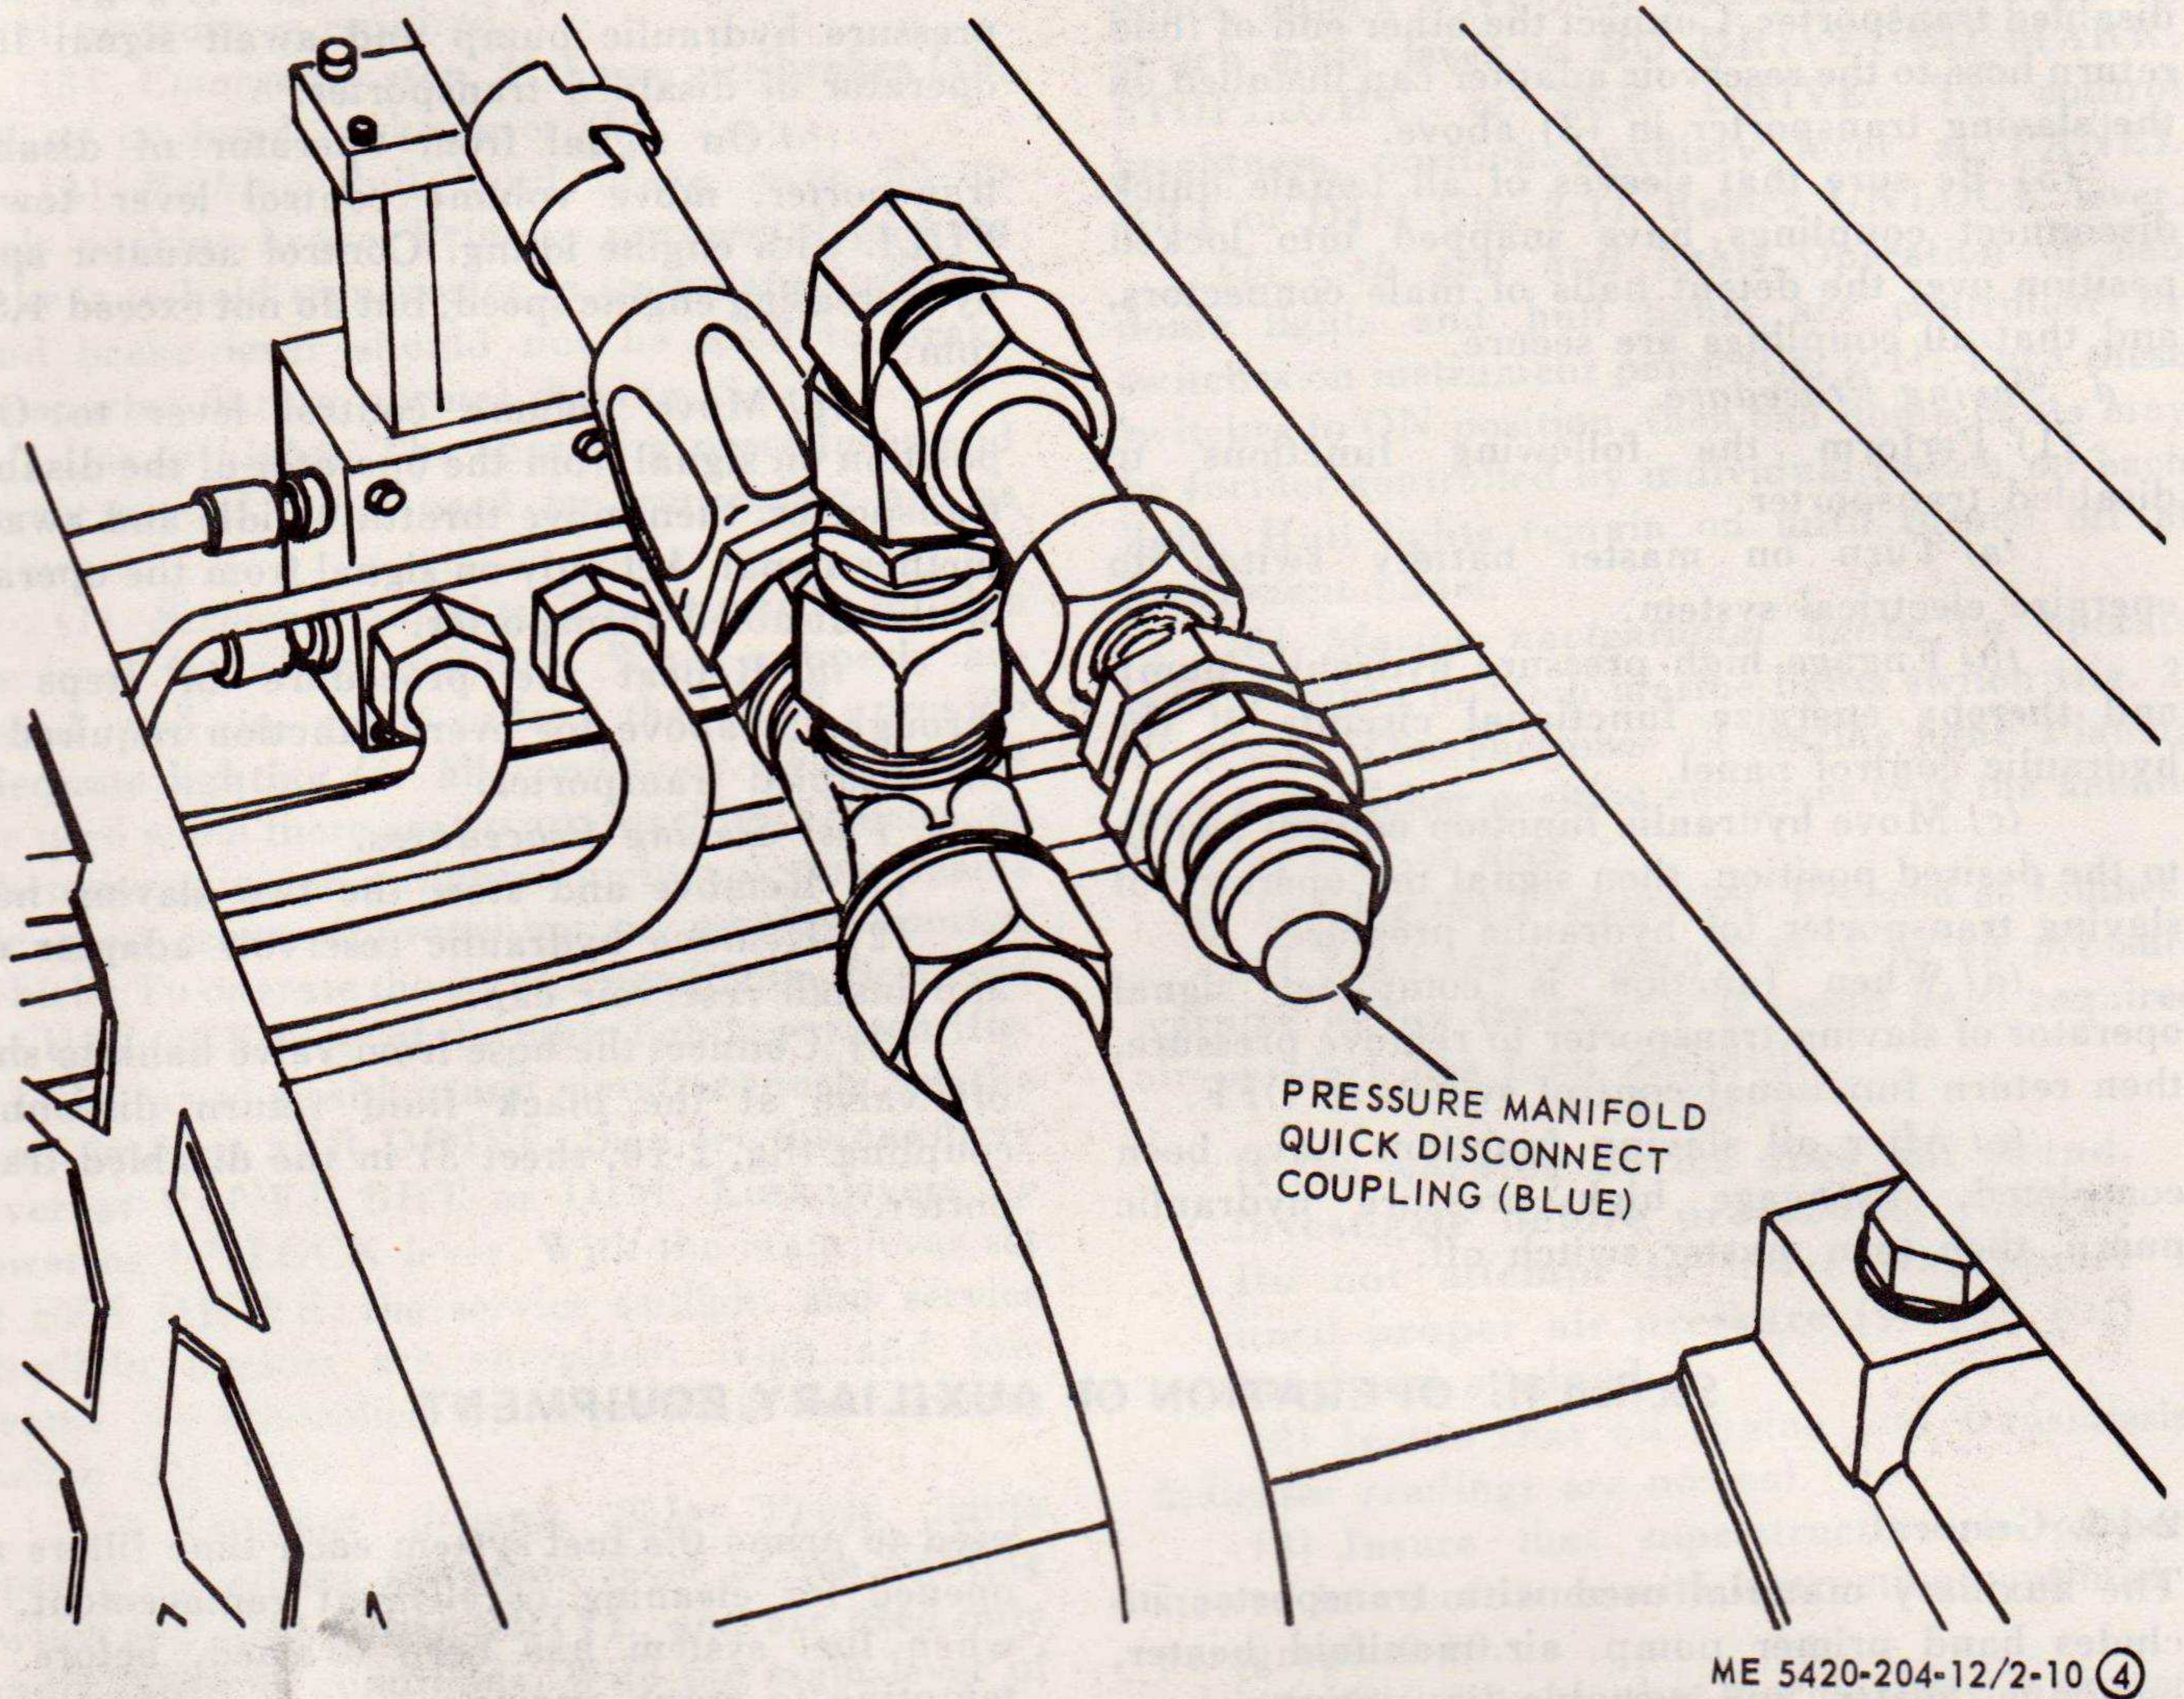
Quick disconnect hydraulic couplings. (Sheet 4 of 4)
